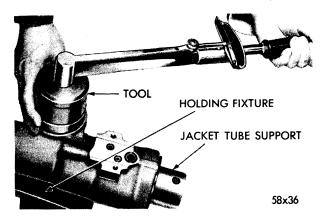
Removing or Installing Gear Shaft Cover Nut with Tool C-3633
